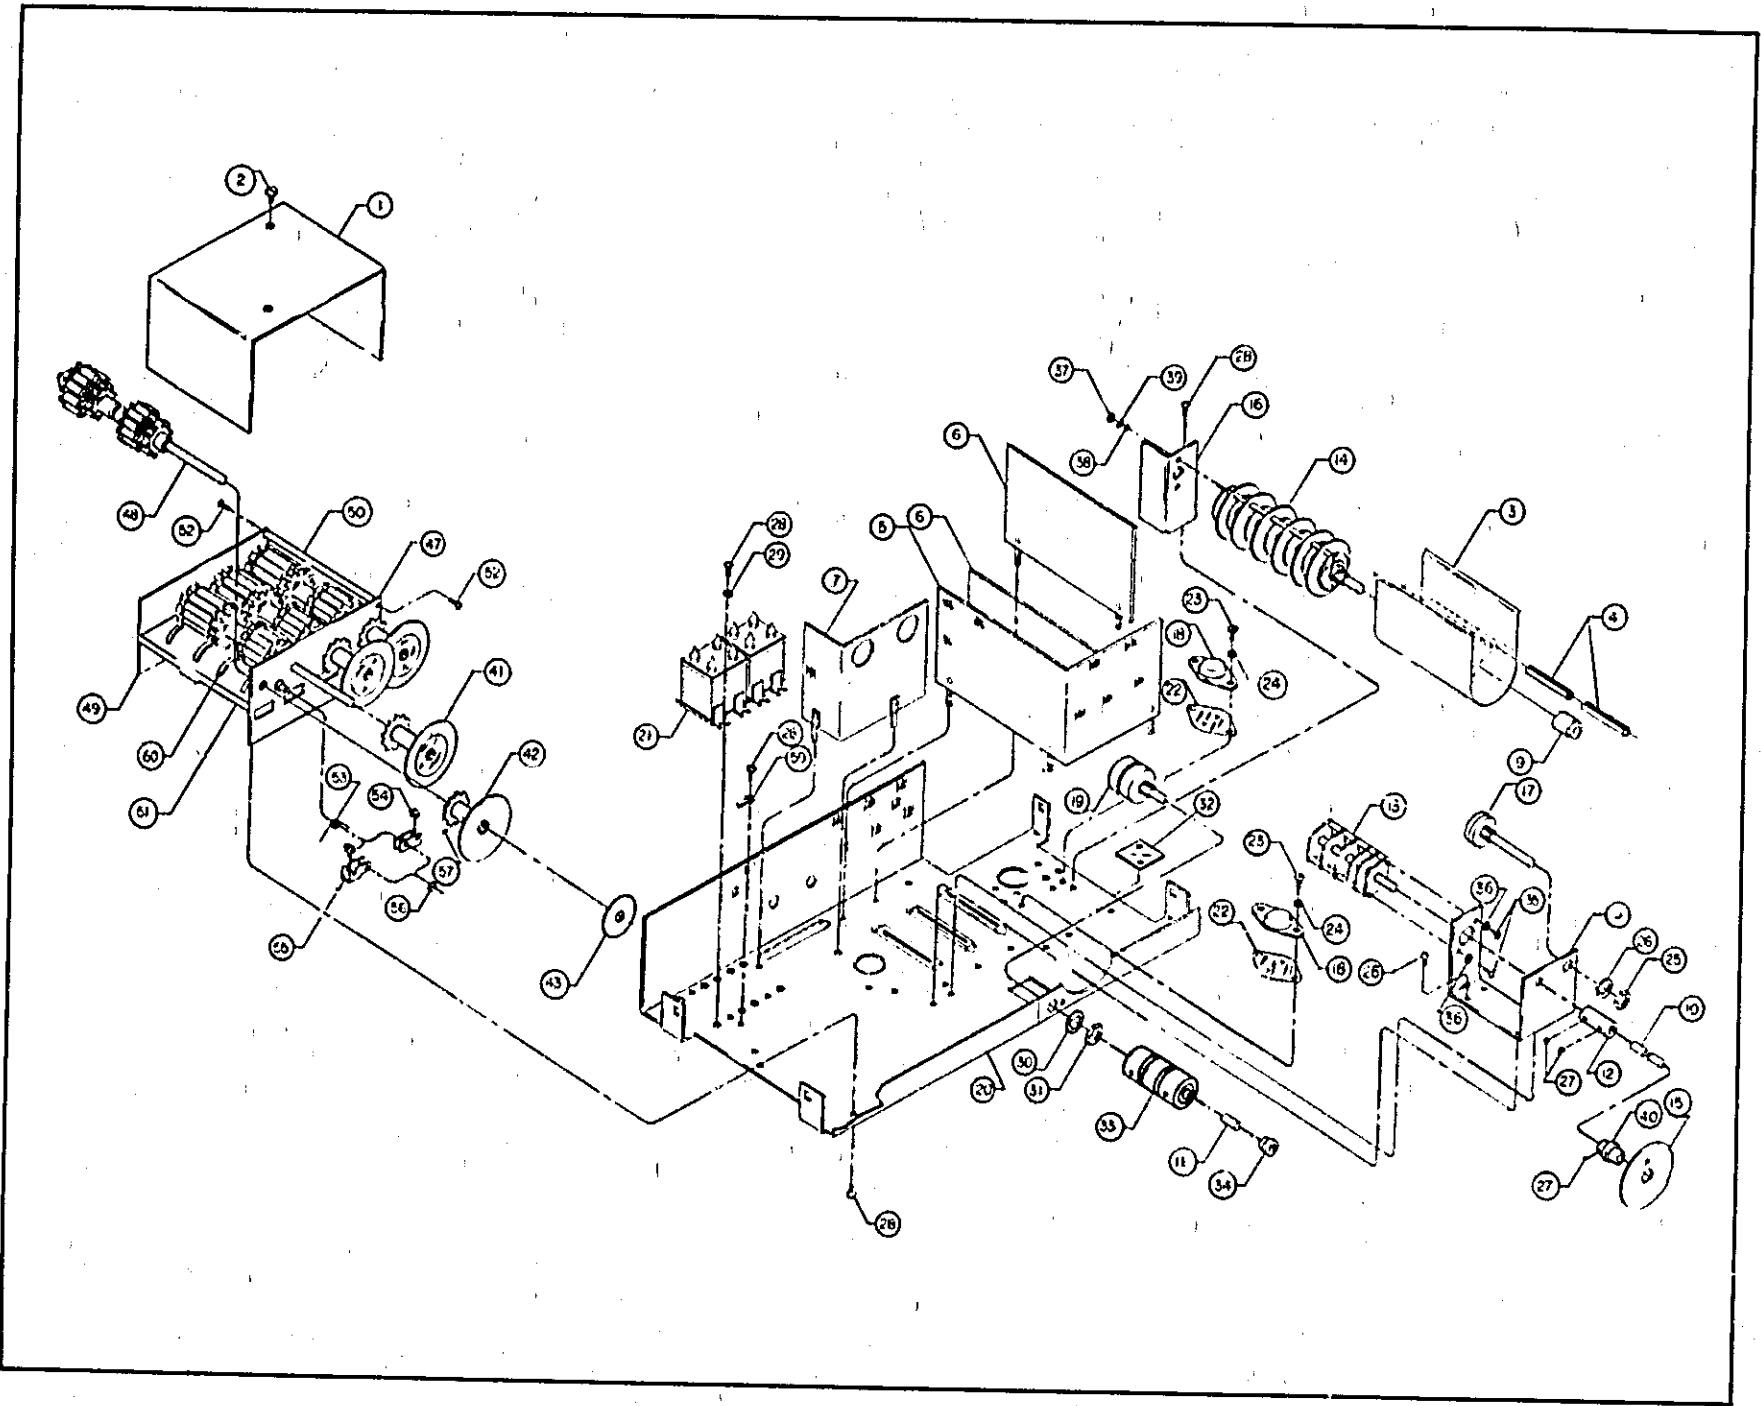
Exploded View of Chassis Assembly (1) (Sheet 1 of 2)
